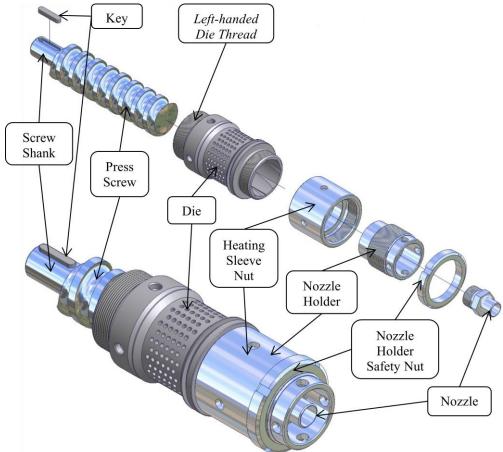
Disassembly and Assembly of Pressing Mechanism
